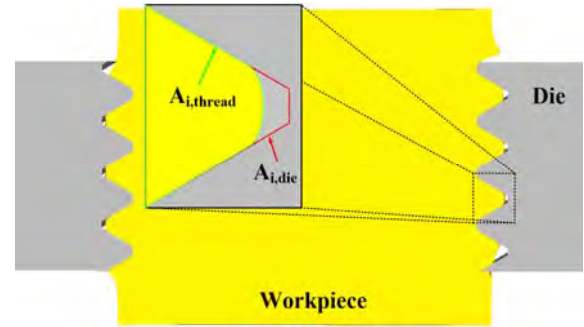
Cross-section of forming dies and workpiece during thread rolling process
